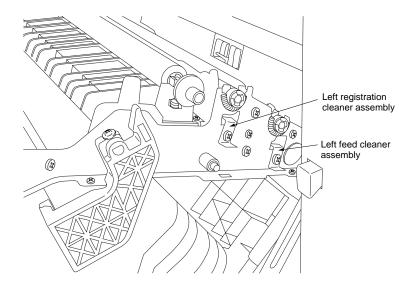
Replacing the left feed cleaner assembly and left registration cleaner assembly (2)
